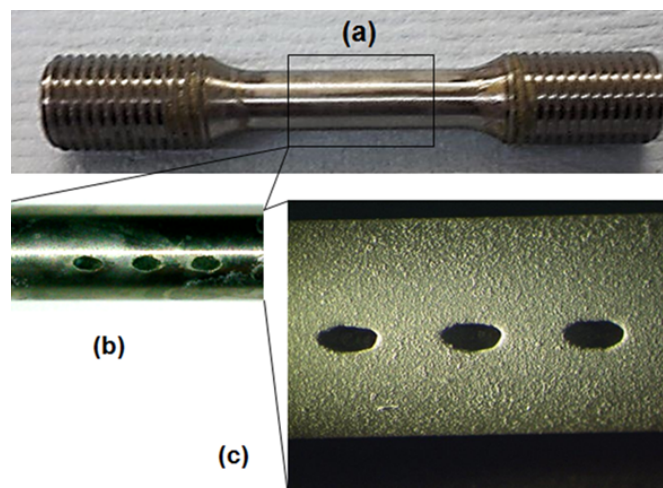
Images of (a) bare CMSX-4 fatigue specimen, (b) laser drilled section and (c) after post-processing and then coated with salt mixture.
